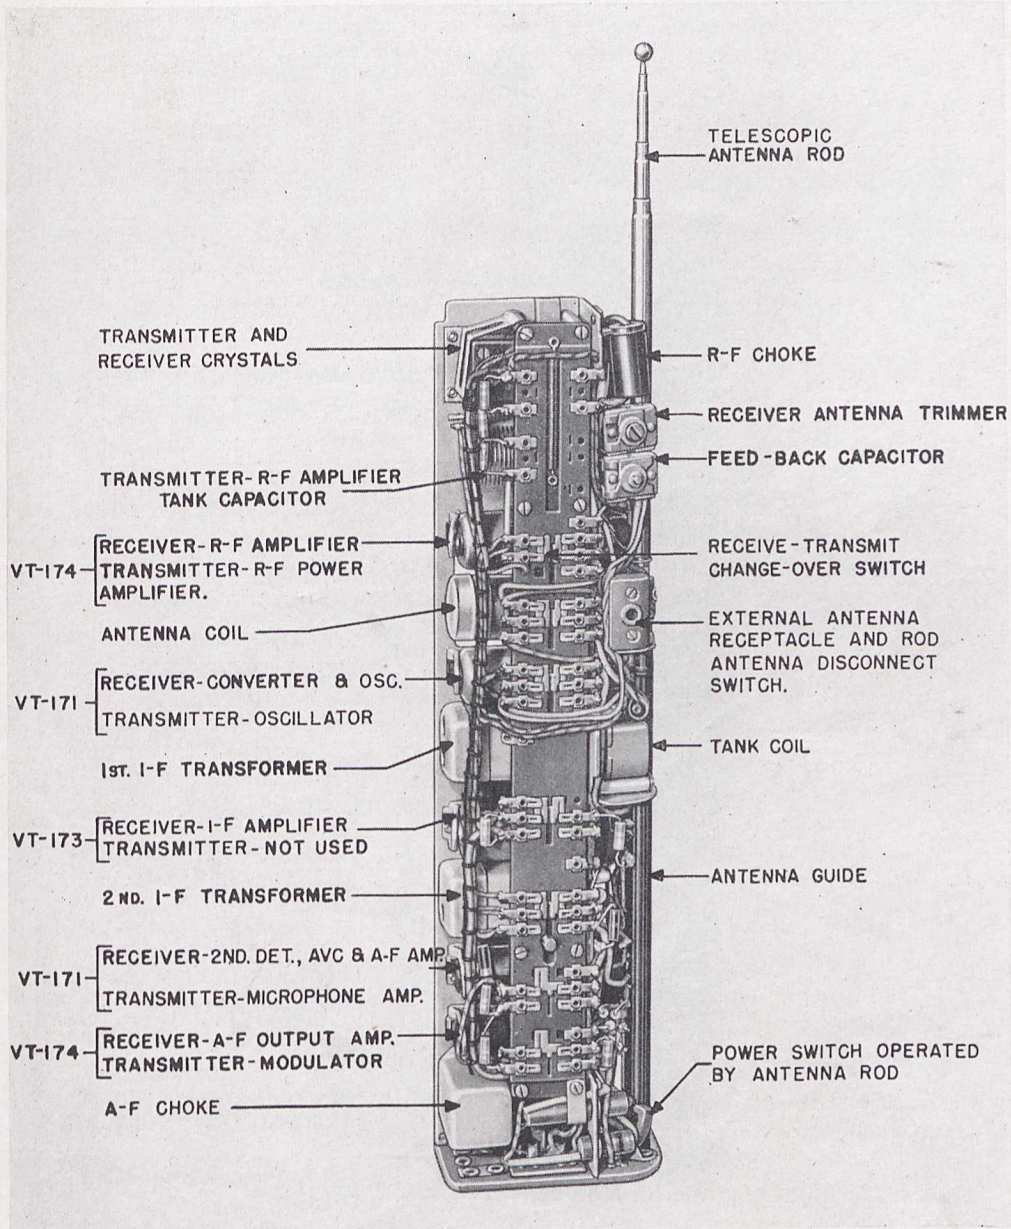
RADIO RECEIVER AND TRANSMITTER BC-721-A CHASSIS (FRONT VIEW)
